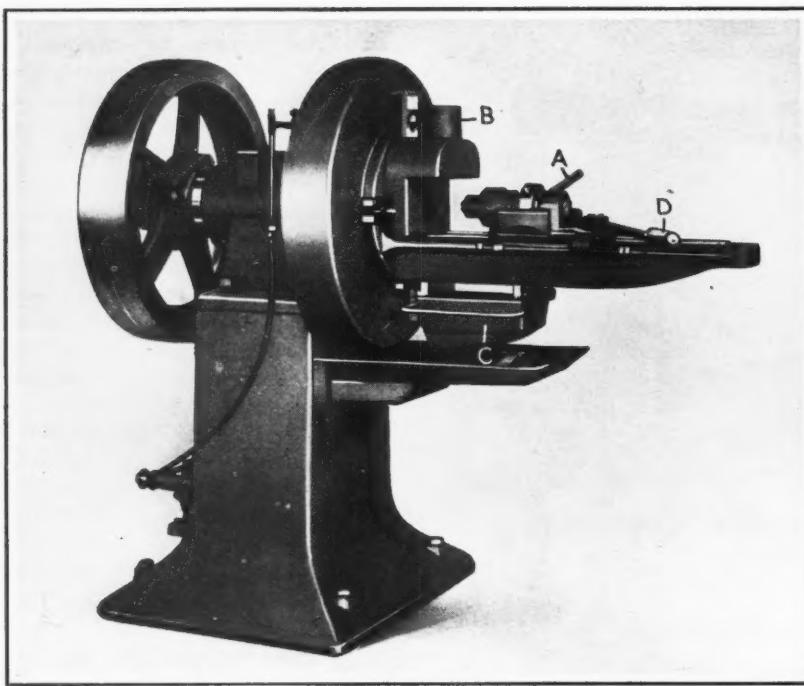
Machine with Smokestack, Hand-operated Work-holder and Rack and Pinion Feeding Device
